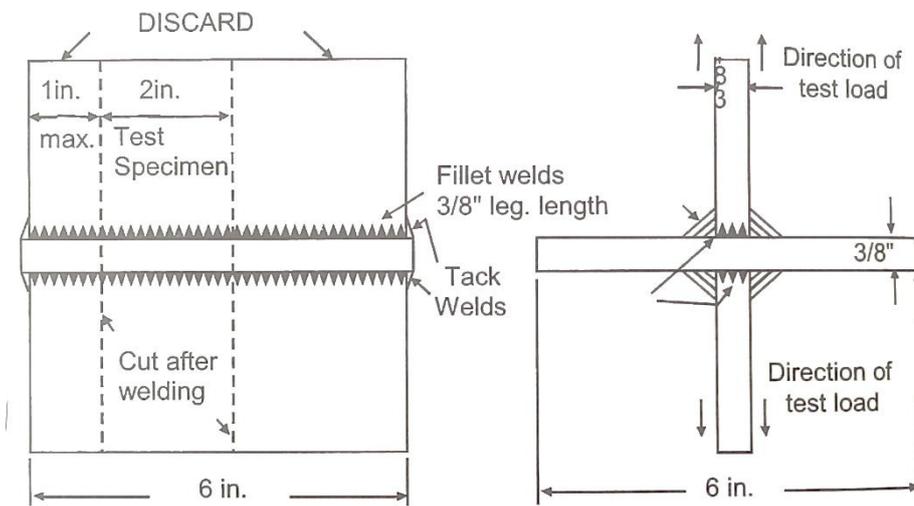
Method of making Cruciform Fillet Weld Test Specimen
